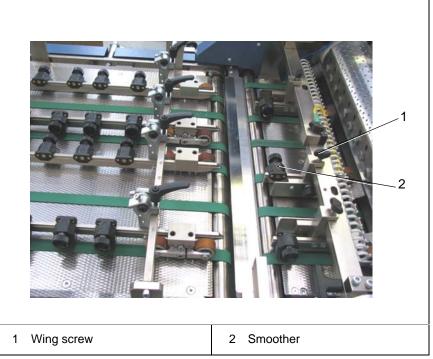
Adjust the smoothers after the cutting cylinder unit.
